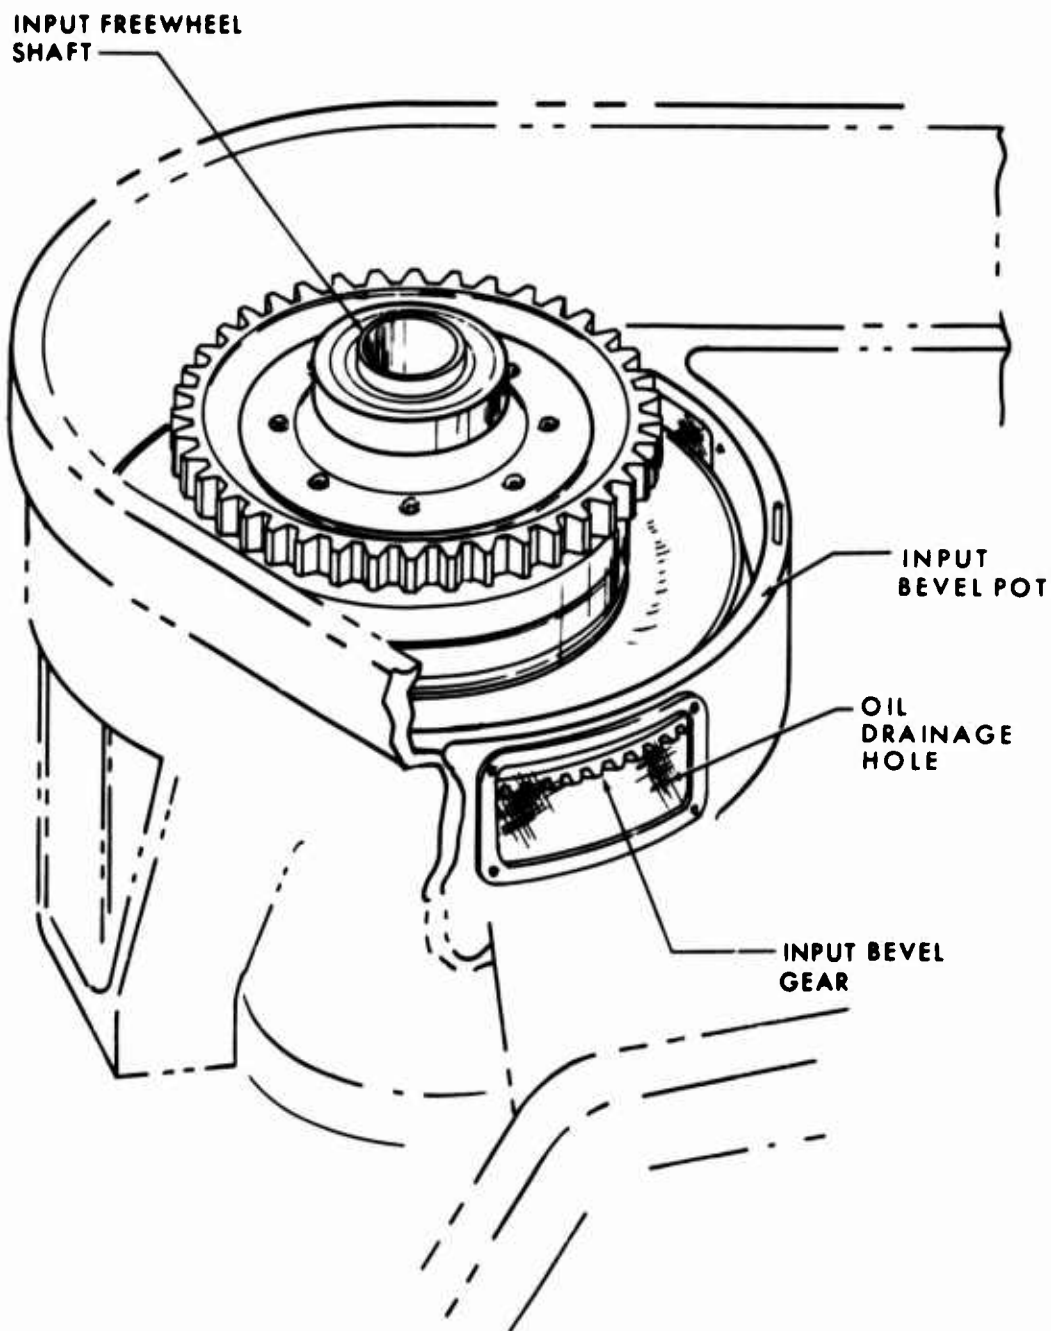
Drainage Ports - Input Bevel Gear Housing.
